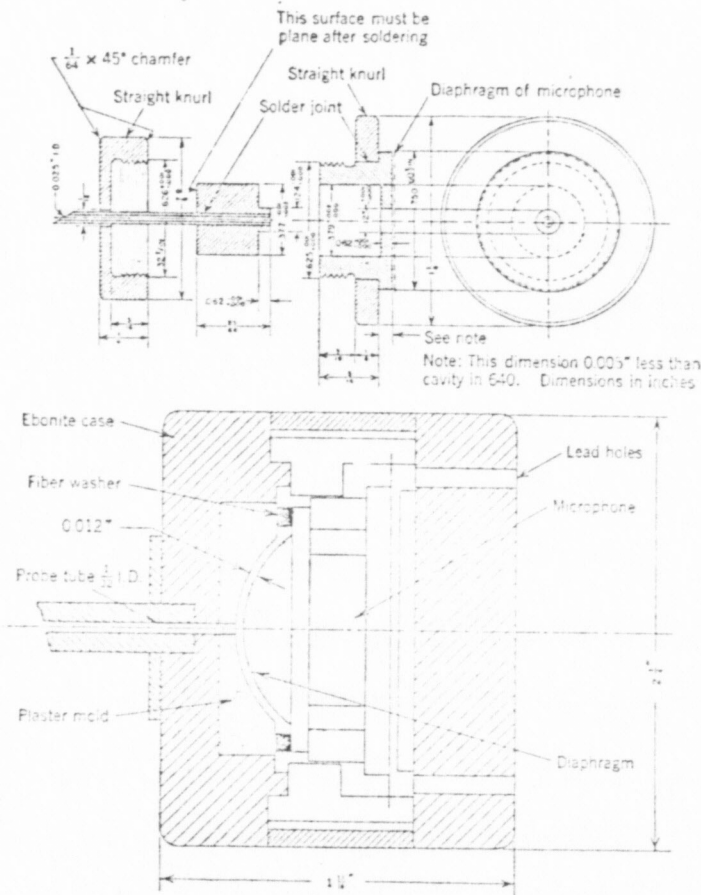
(Above) Attachment for joining probe tube to standard condenser microphone. (After Nichols *et al.*<sup>12</sup>) (Below) Attachment for joining probe tube to dynamic microphone (from Ref. 13.)
